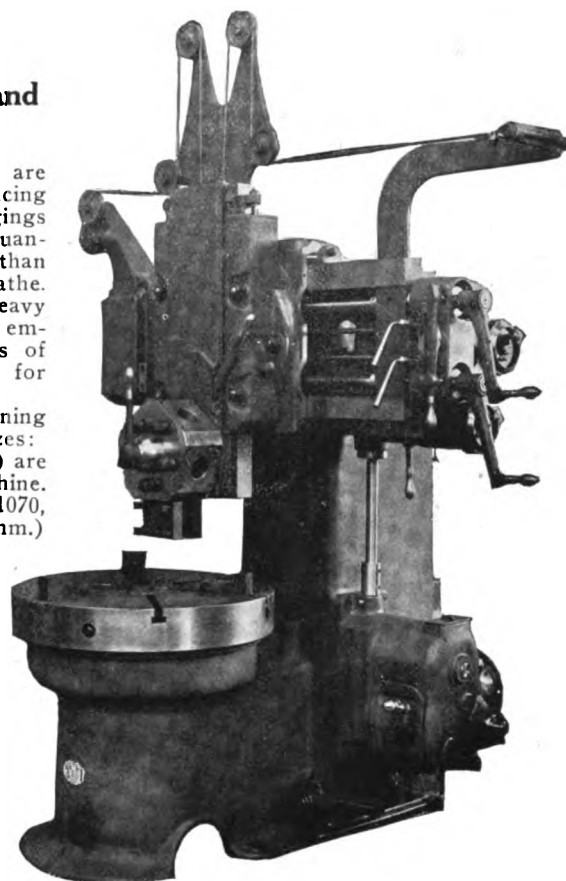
Gisholt Single-Head Vertical Boring Mill, Equipped with Chuck Table
